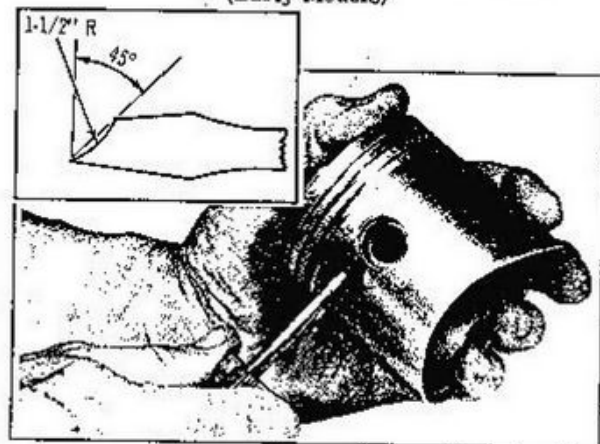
C-60A. Removing Piston Lock Rings (Late Models)
